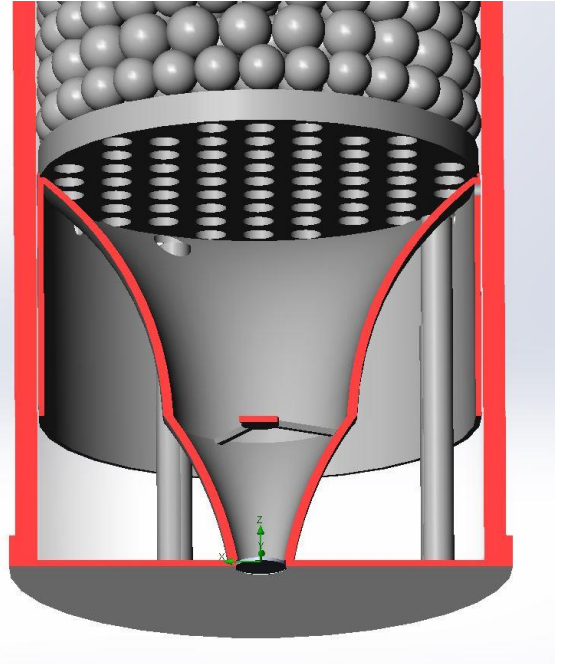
CAD section view of the chosen cone placed in the filter.
